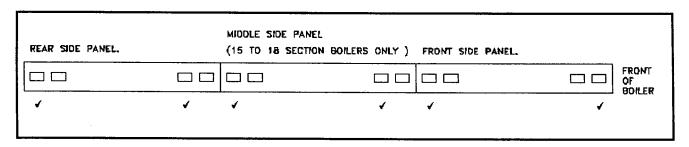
Side Panel Latch Positions for Mounting Top Panels
